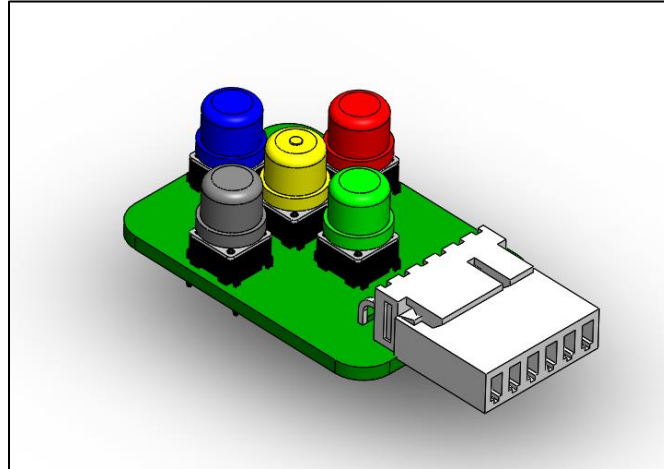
Solid model of PCB assembly with plastic pushbutton caps
